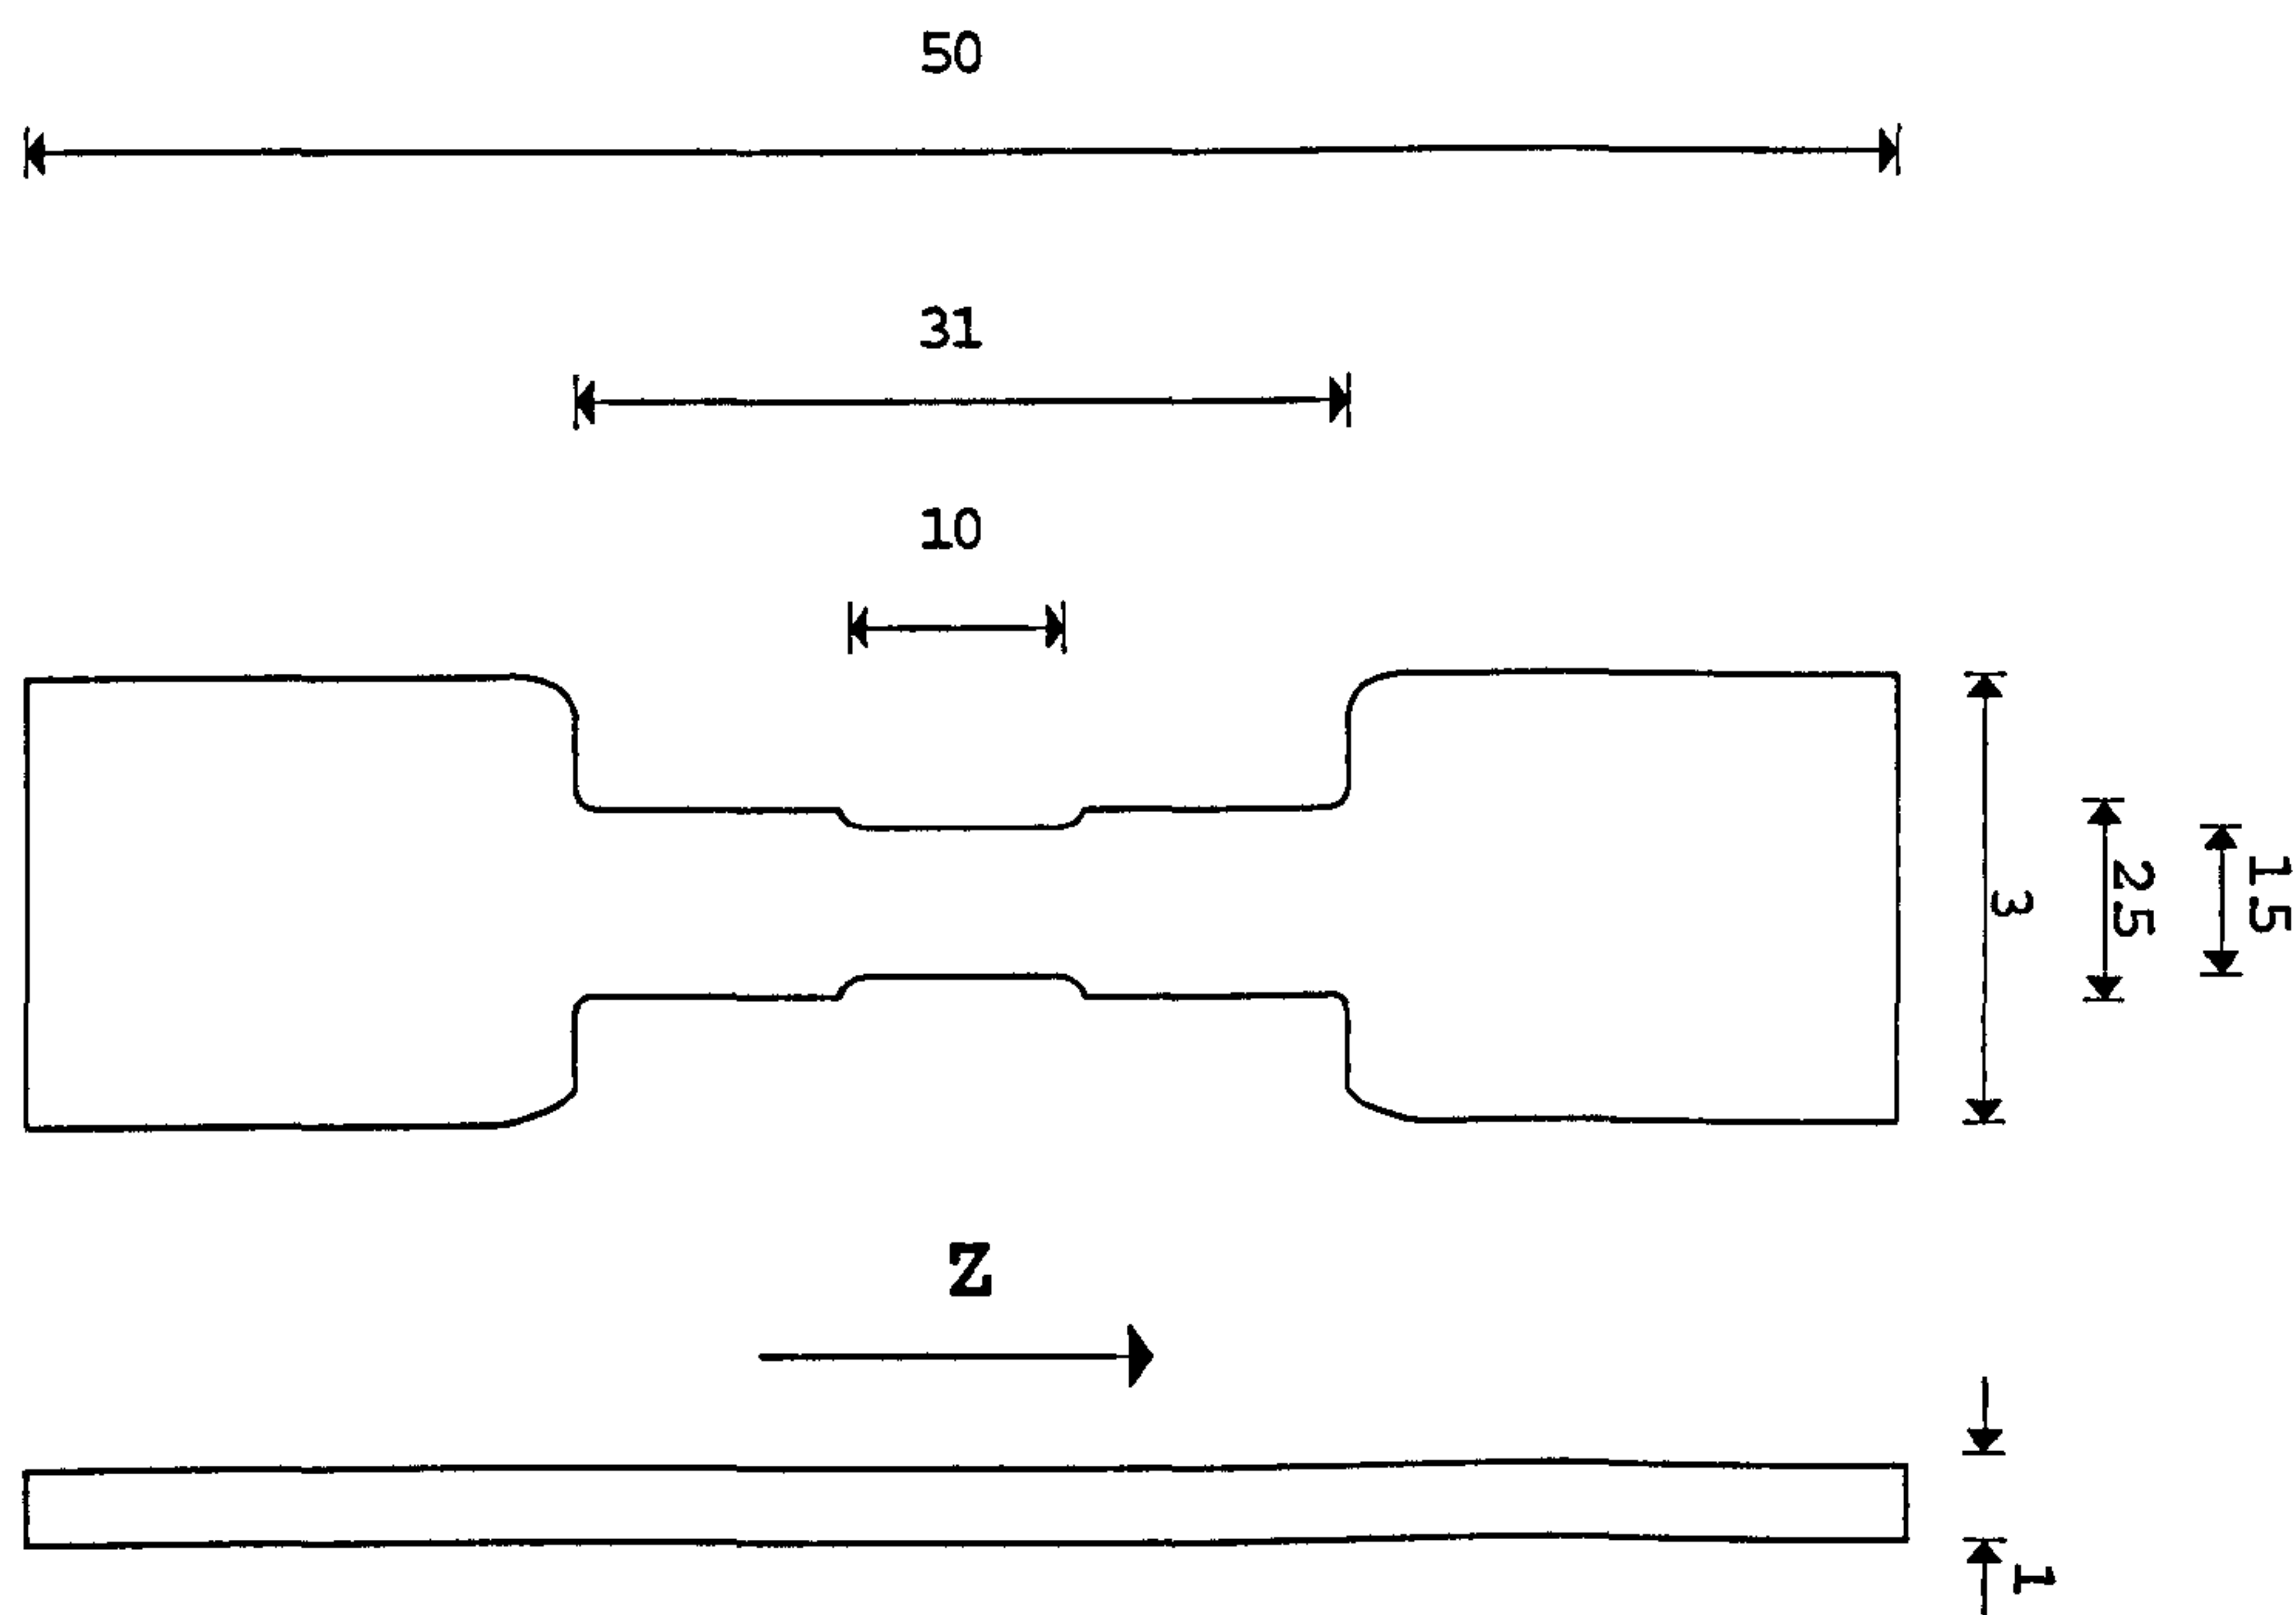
Shape and dimensions of a specimen for “in-situ tensile test in SEM”; the dimensions are in millimetres
